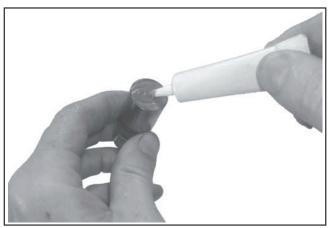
Applying Camshaft Lubricant to Bottom of Lifters.
